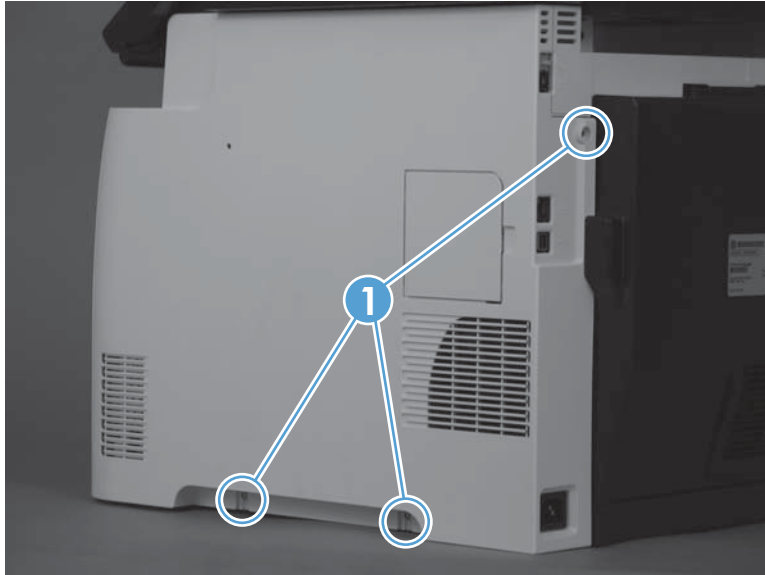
Remove the print-cartridge drawer (3 of 3)
